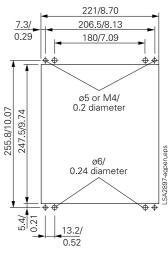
/29 1/2 and 1/1 x 19" surface-mounting housing
